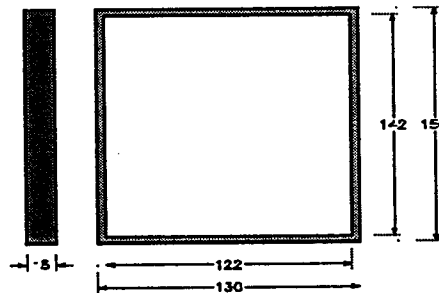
Flat plate solar collector (FPC) overall dimensions in cm.
